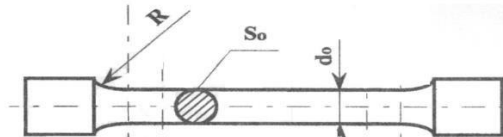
For cast, forged or rolled steel profiles
